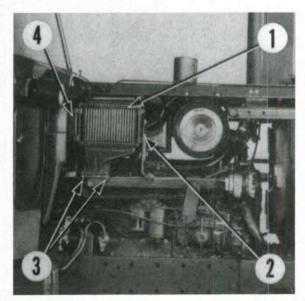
View of intercooler core installed on the engine. Intercooler core
